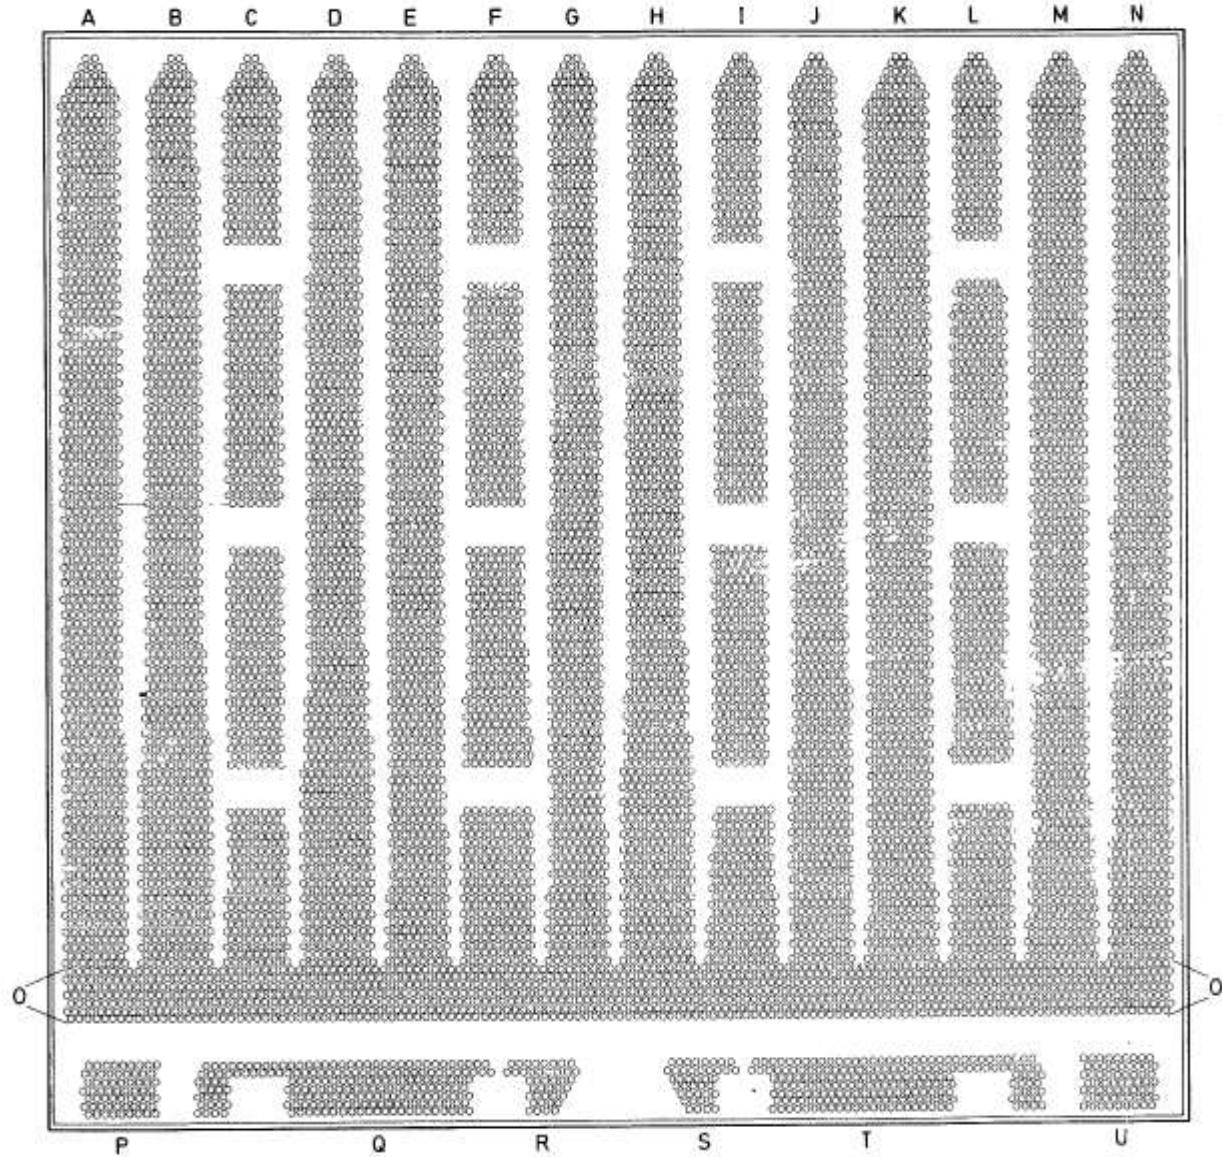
Tutuka Main Condenser Tube plate/Tube sheet viewed from outlet water box
